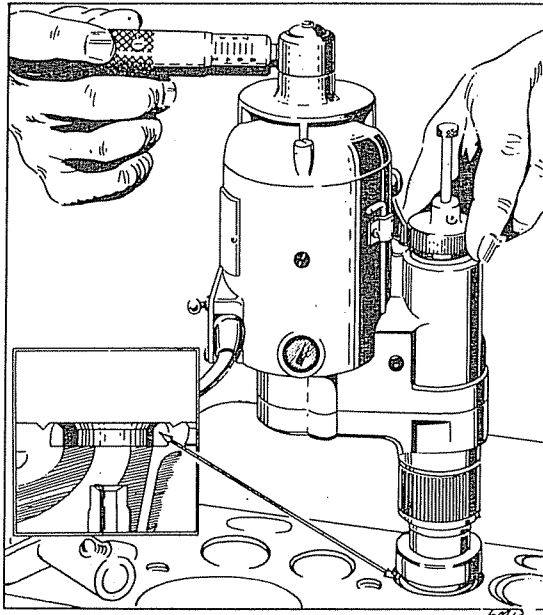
Grinding Exhaust Valve Seat Inserts.
